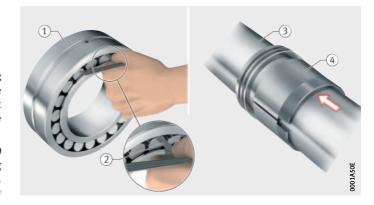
Measurement of the radial internal clearance of a spherical roller bearing
